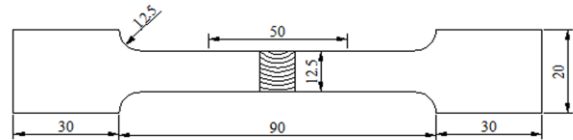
(c) Dimensions of Tensile Specimen (in ‘mm’)
